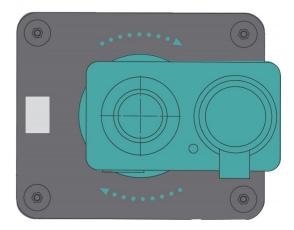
Part label and directionof-rotation marking on mounting plate
